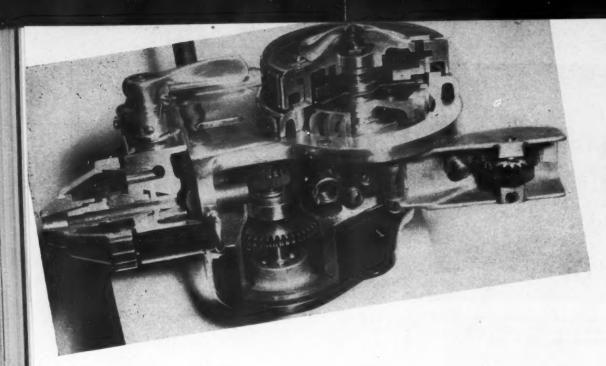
A cutaway section of the new production type spray gun showing details of the nozzle and the turbine governor.
